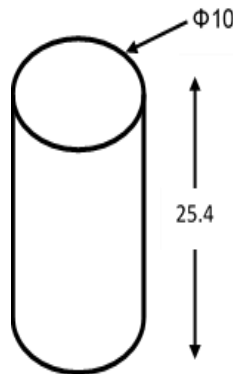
ASTM standard specimen for wear test (all dimensions are in mm)
